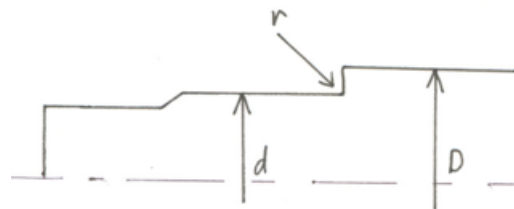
Sketch of shaft bearing surface to main shaft diameter.
